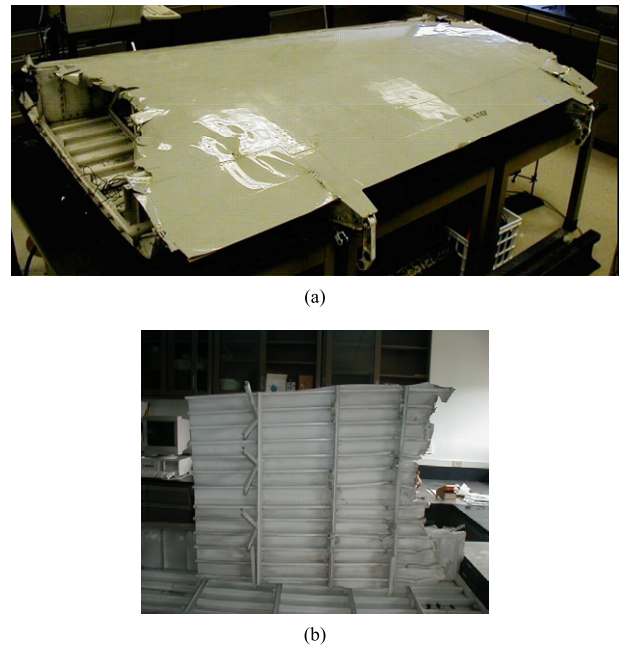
(a) E-2 surveillance aircraft wing section; (b) the disassembled top panel of the wing.
